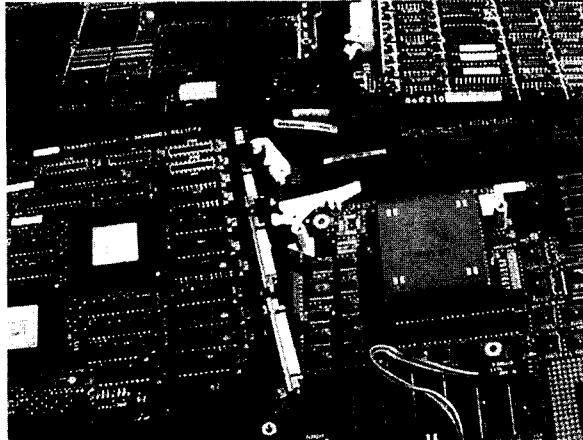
Print Circuit Boards(PCBs) from the obsolete electronics.
